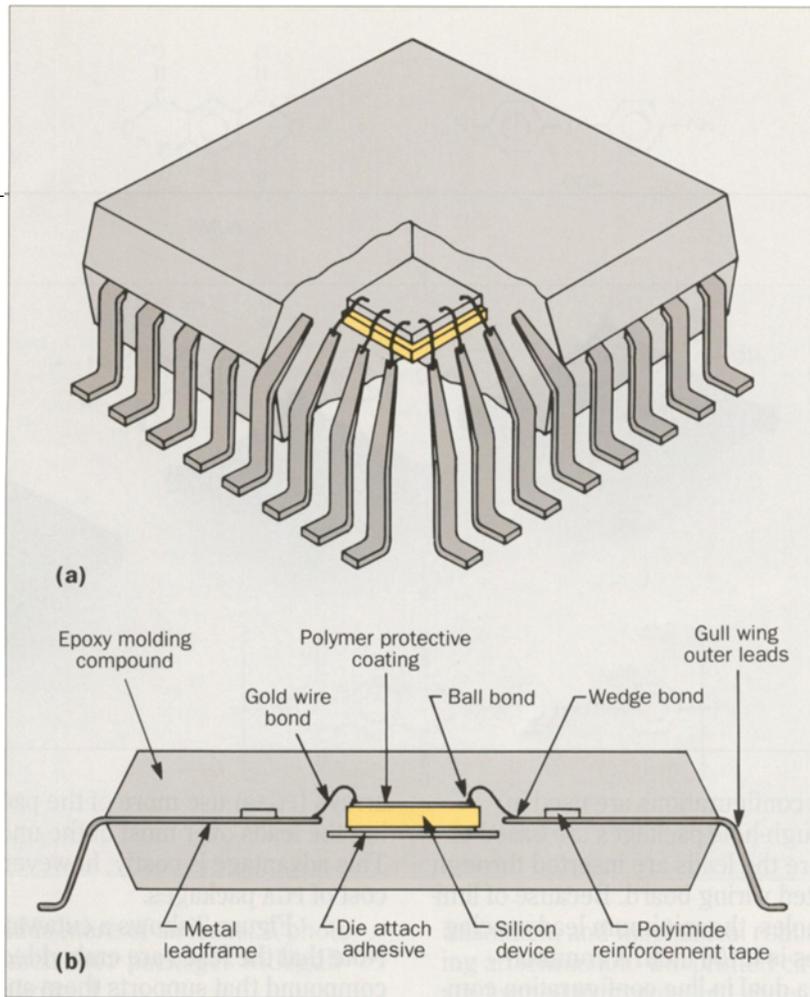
Cut-away (Figure 2a) and cross section (Figure 2b) views of a plastic quad flat package (PQFP), a surface mount, molded plastic package. The principal materials used in the package are shown.
